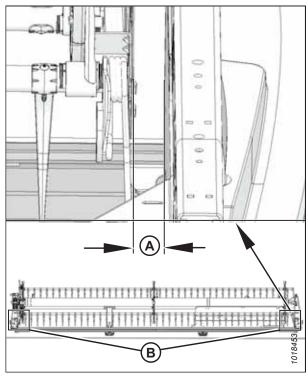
Centering Reel – Single Reel (Double Reel Similar)
